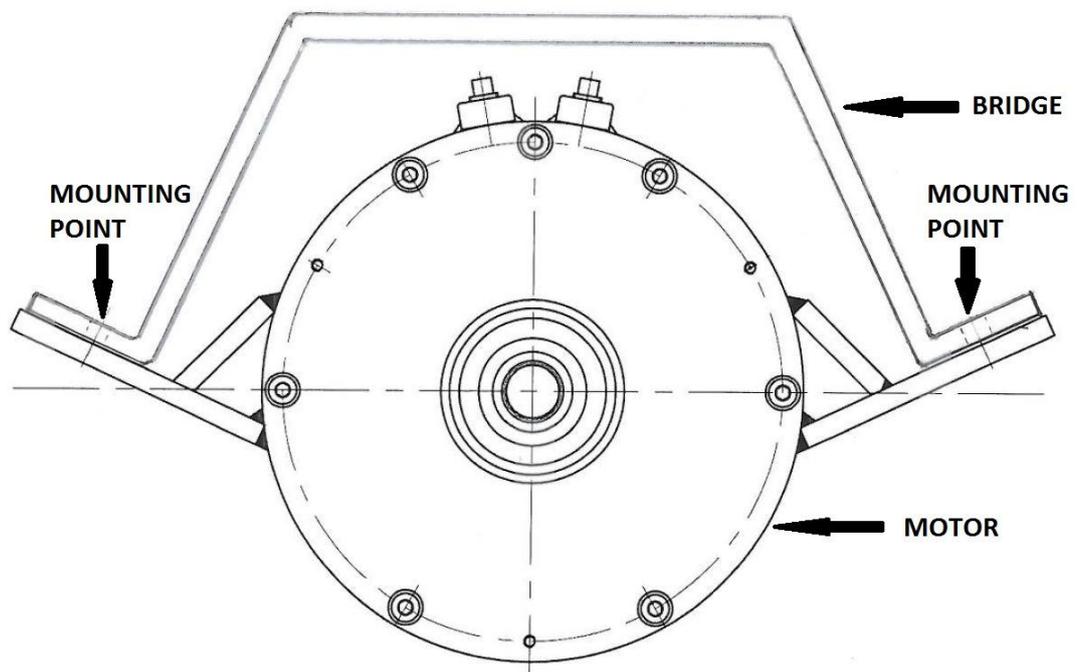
Simple flat bar bridge for mounting components above the motor in the REVjet
